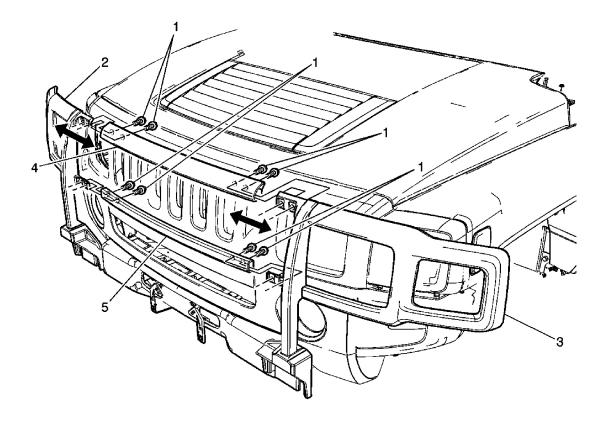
Identifying Grille Guard/Brush Guard Courtesy of GENERAL MOTORS CORP.
